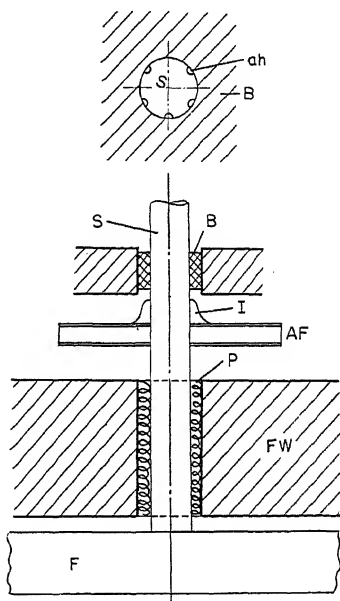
Auxiliary fan for cooling of blower shafts: *F*, fan; *S*, shaft; *FW*, furnace wall; *B*, bearing; *P*, packing against leakage; *AF*, auxiliary fan; *I*, intake for auxiliary fan; *ah*, airholes in shaft to cool bearing.
